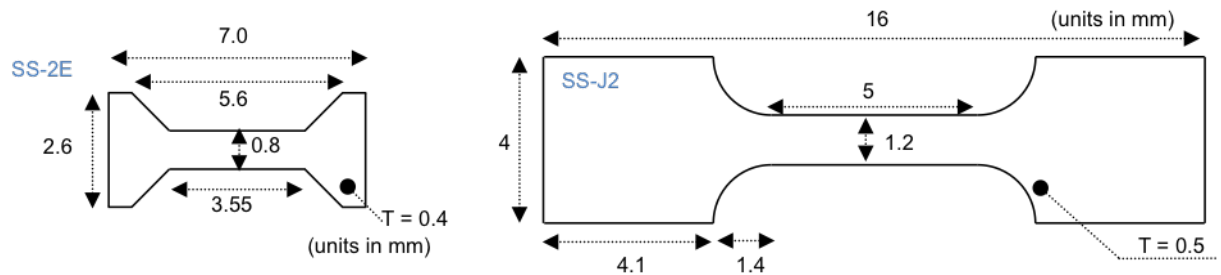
Simplified schematic of the tensile specimen geometries for weld and irradiation testing. Figure not to scale. Reproduced from Ref. [8].
